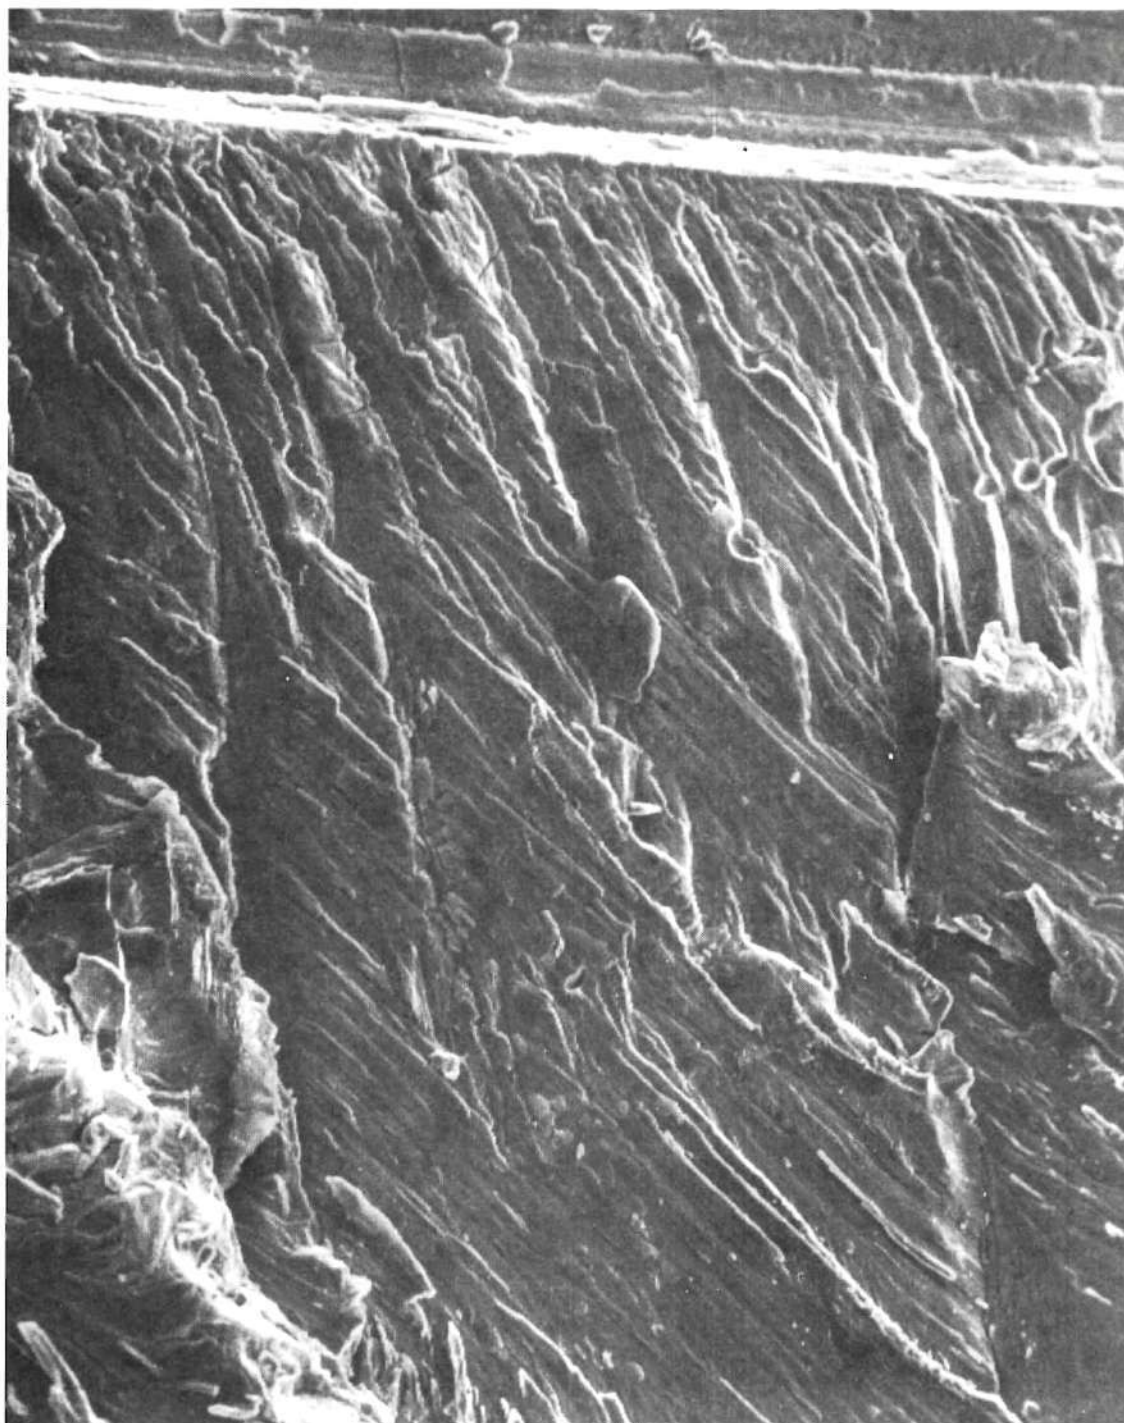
Fracture Surface of the Specimen A2; Stepped surface.
